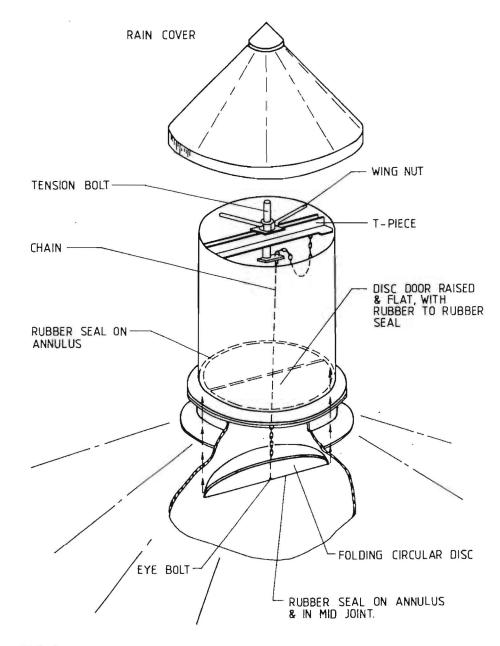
DESIGN OF A TYPICAL BIN ROOF HATCH SEAL
